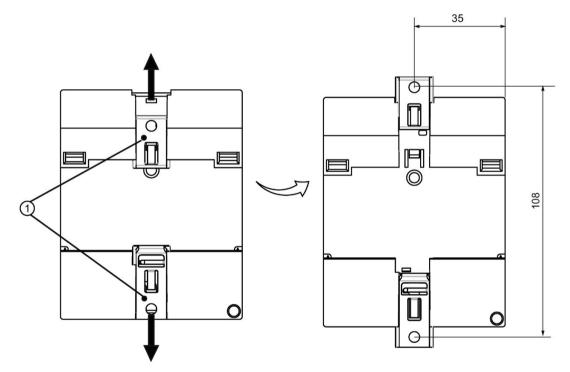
Control panel mounting of the PN/J1939 LINK
